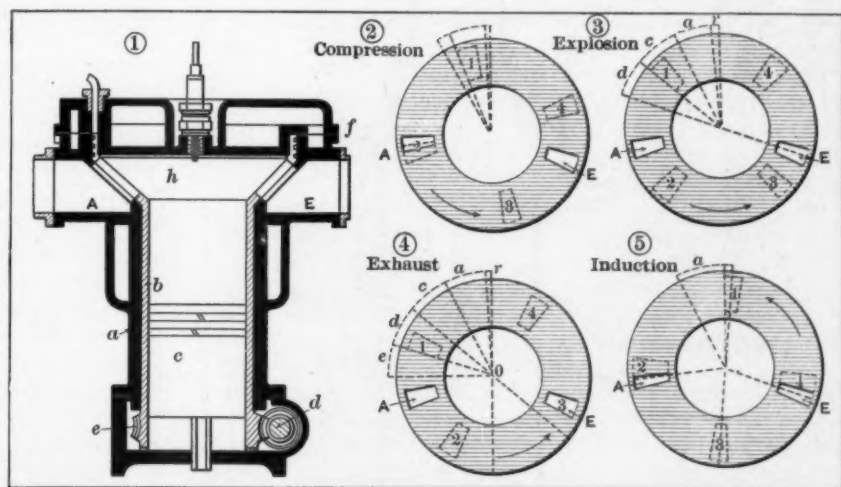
Reproduction of patent drawing for Renault valveless motor. (1) Sectional view of cylinder. (2) Plan view showing position of ports at end of suction stroke. (3) When port 1 has passed the angle *c*, representing the compression period, the explosion will take place. (4) Exhaust to begin. (5) Suction to begin.
